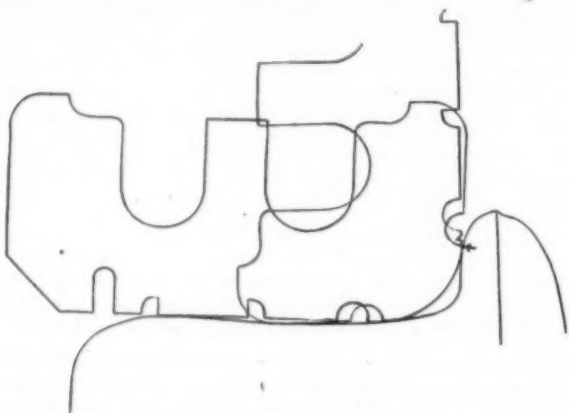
Sketch Difference in Flange Measurement when Gage is Used Horizontally and Vertically
